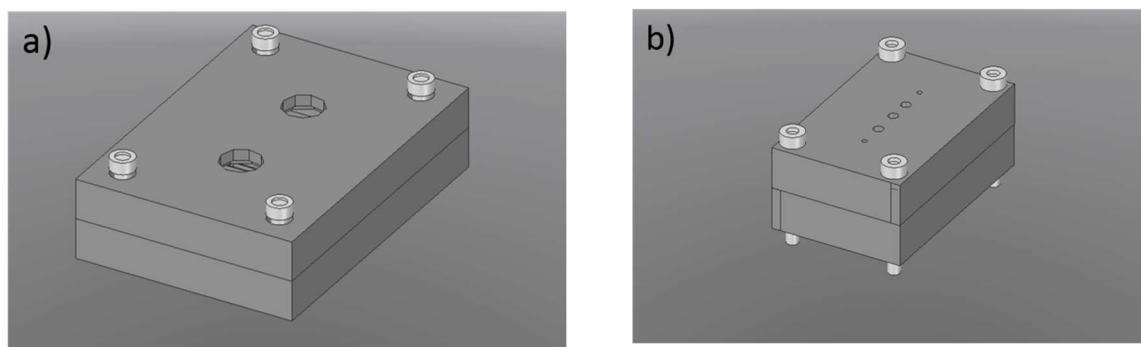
Housing of MMP integrating fluidic and electrical connections: (a) top and (b) bottom views
